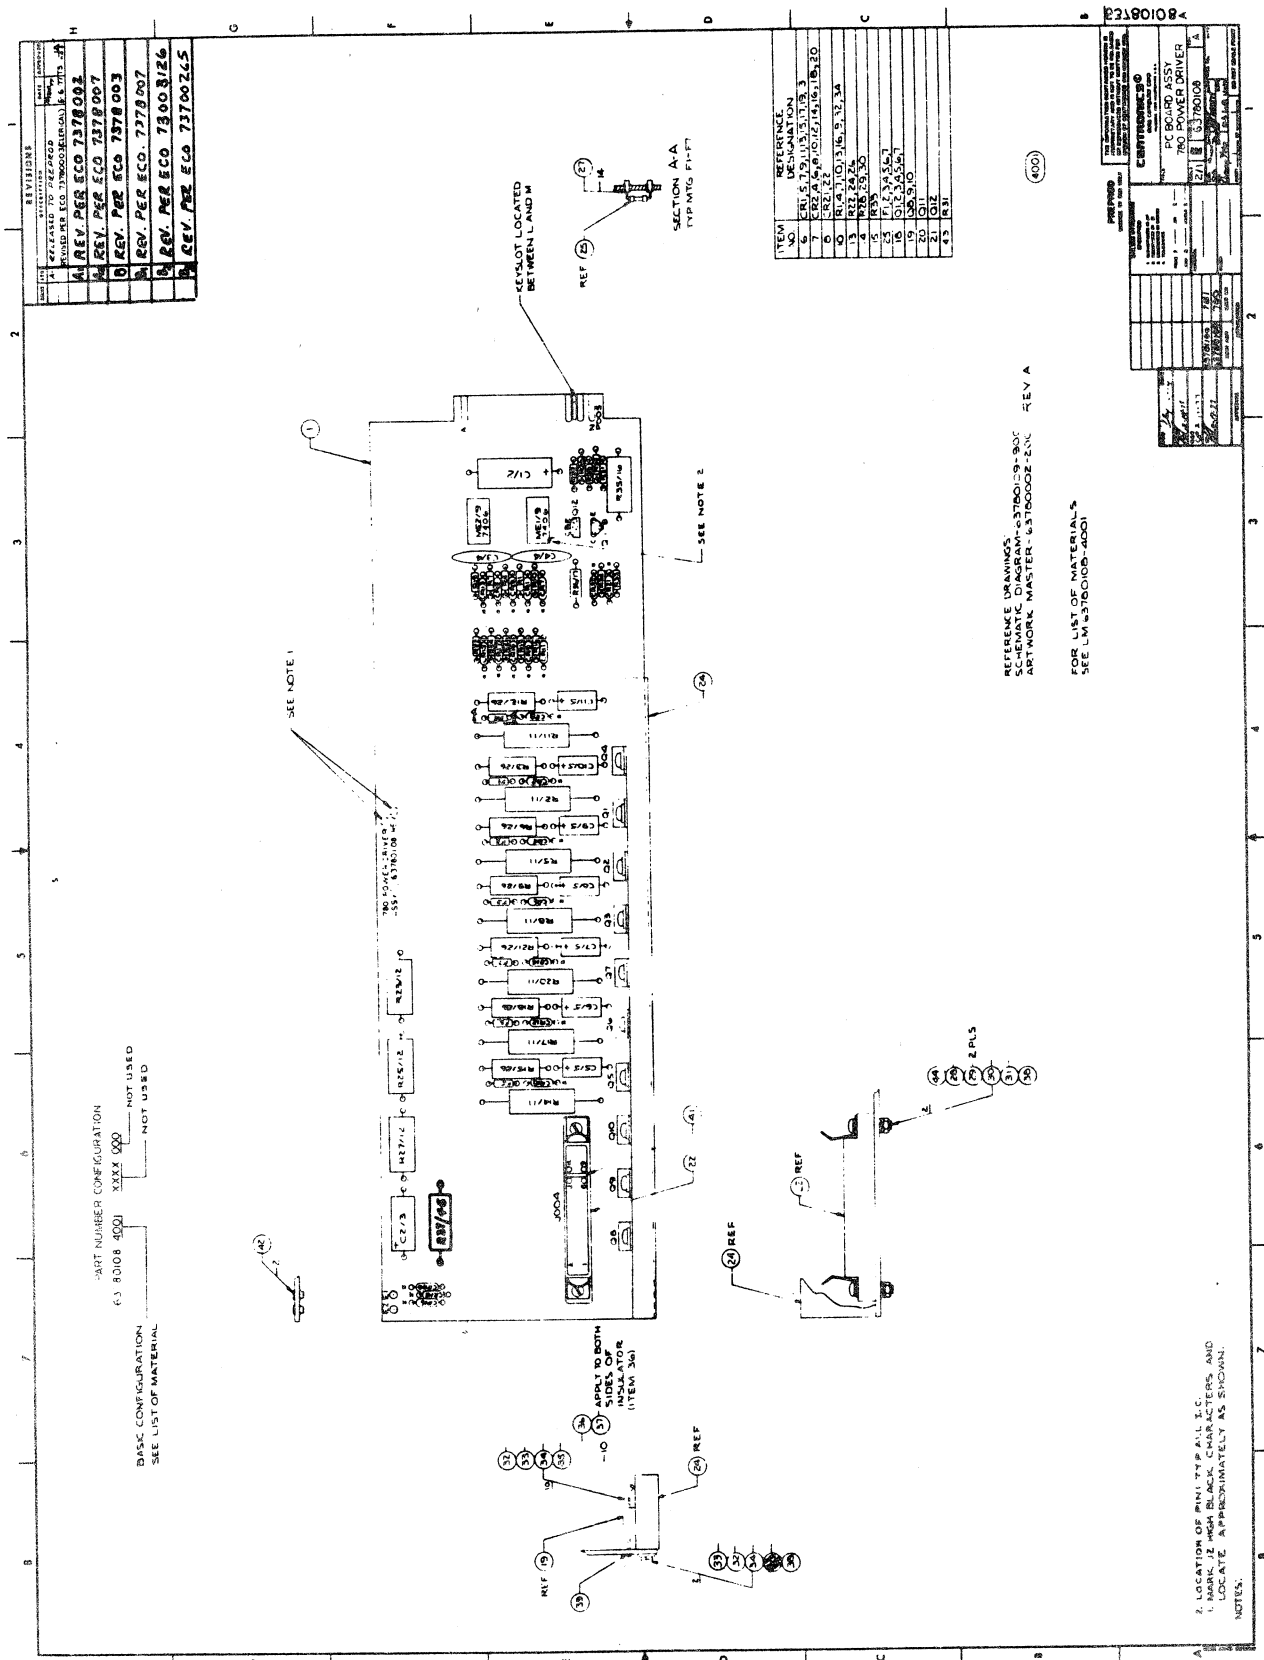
POWER DRIVER BOARD ASSEMBLY
